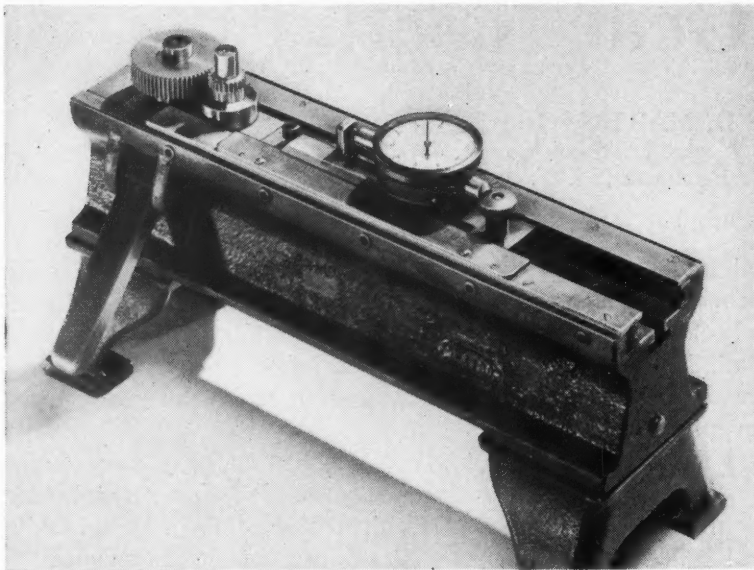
Early type of variable-center distance fixture that was designed to check the composite error in gear teeth by running two gears together and checking their radial displacement
